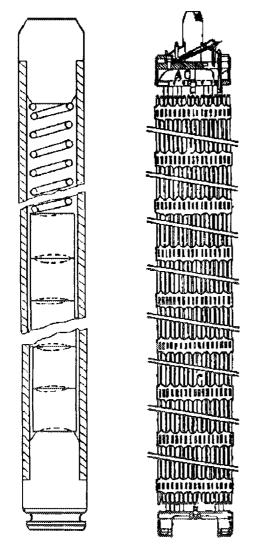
General design of PWR fuel rod and assembly (17×17 type)
